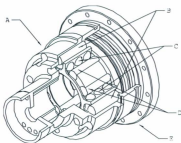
Prop hub torque transmission drive component arrangement.
